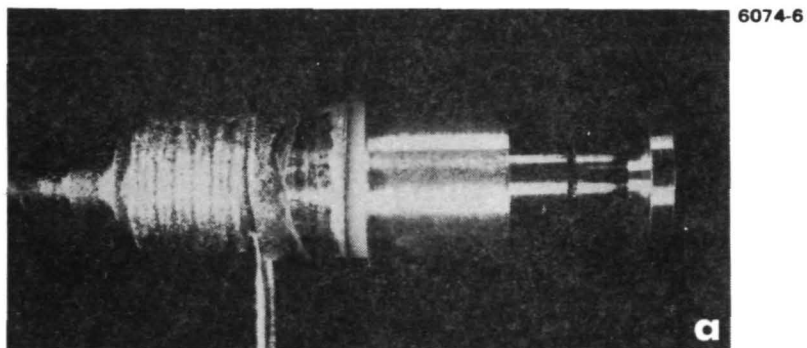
900-series neutralizer assembly showing demountable isolator-vaporizer sub-assembly.
